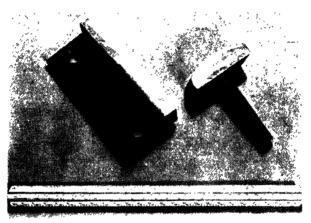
Shear blades with a hard surface cutting edge (Courtesy of: Wall-Colmonoy Corporation)
